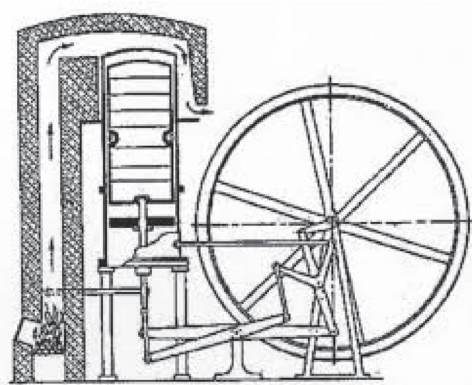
View of Stirling's engine patent drawing, 1816 [24].
